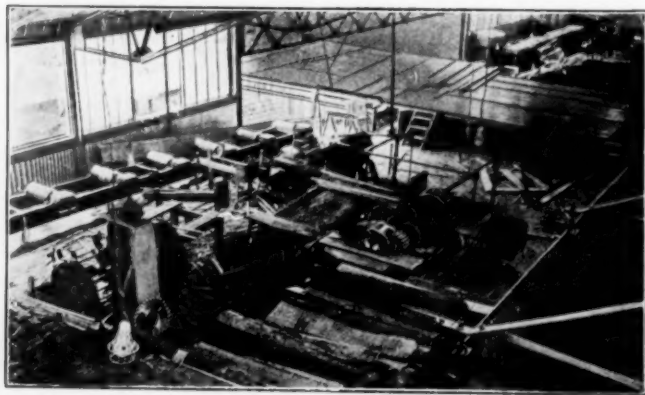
LATH MILL SHOWING DIRECT-CONNECTED MOTOR DRIVING LATH BOLTER AND LATH MACHINE
